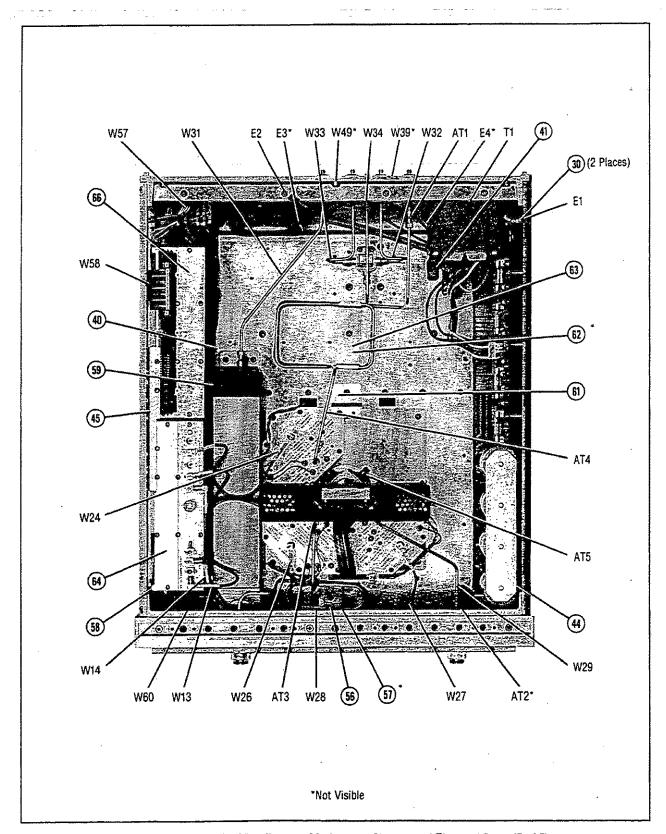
HP 8513A Miscellaneous Mechanical, Chassis, and Electrical Parts (5 of 5)
